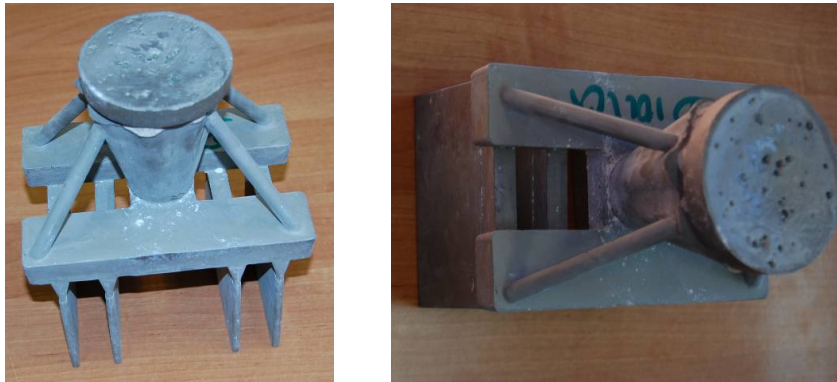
Molds after pouring with molten metal and the removal of ceramics.
